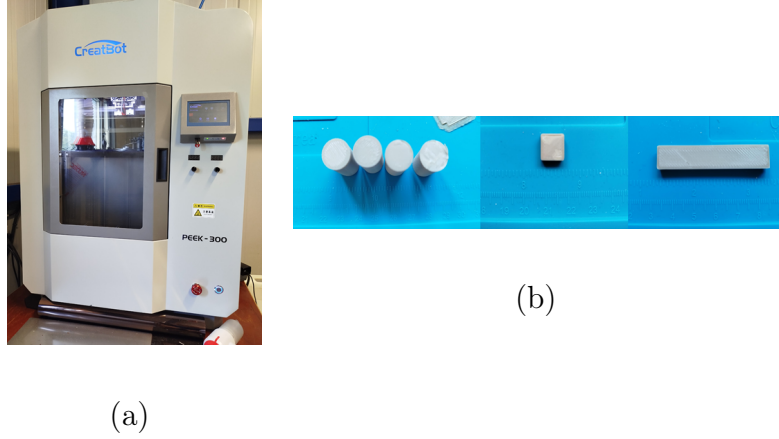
3D printer and samples; (a) 3D printer used, (b) Result of Printed Samples, ASTMD695 (left) ISO 604 (middle and right)
